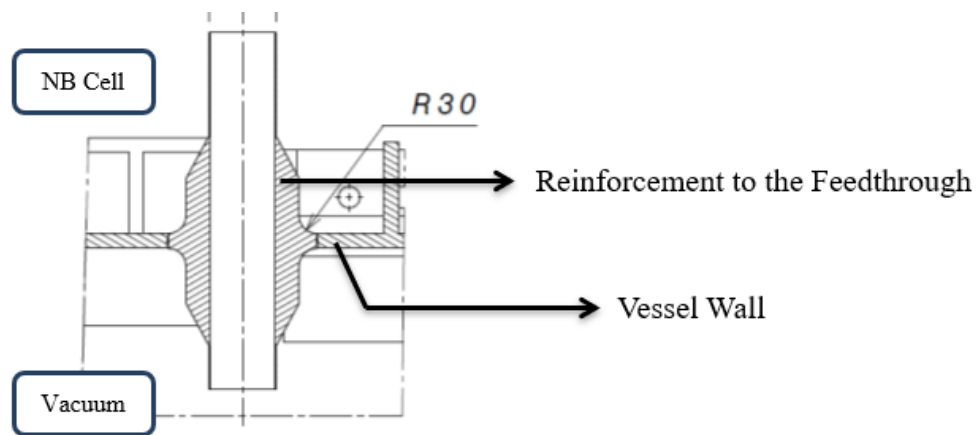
Welding configuration for feedthrough connection with the vessel
